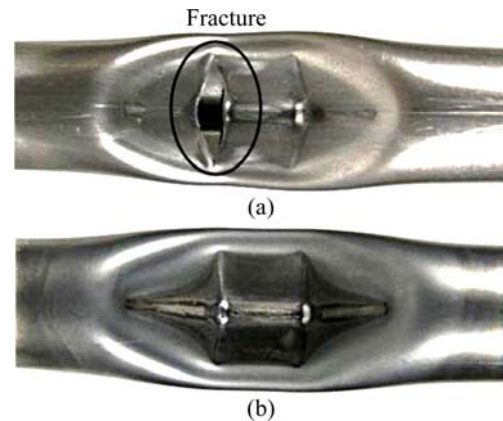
V-shaped cold and hot-formed tubes using resistance heating: (a) Cold forming; (b) Hot forming
